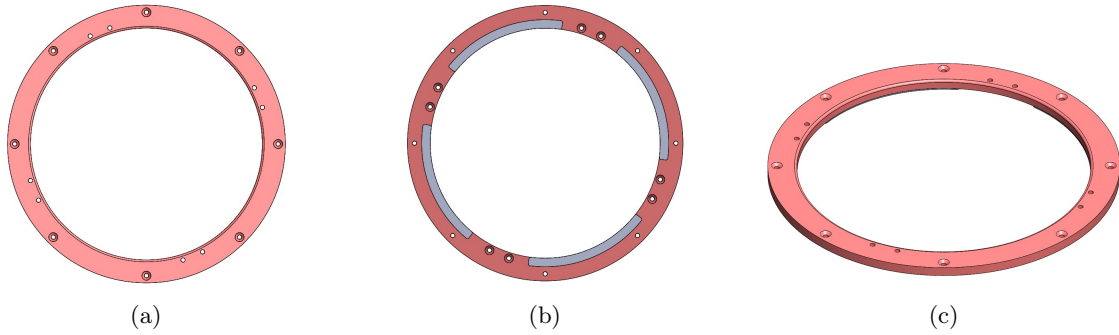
Clamping part: (a) top view (b) bottom view (c) isometric view.
